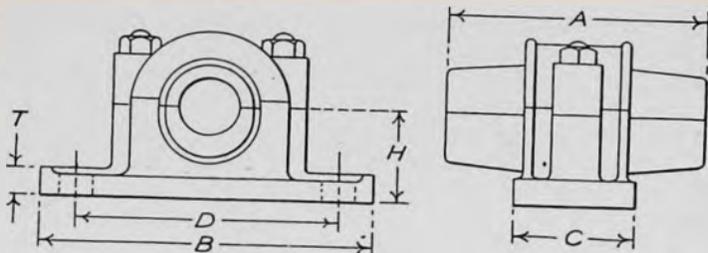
Ring-oiling Ball and Socket Pillow Block
